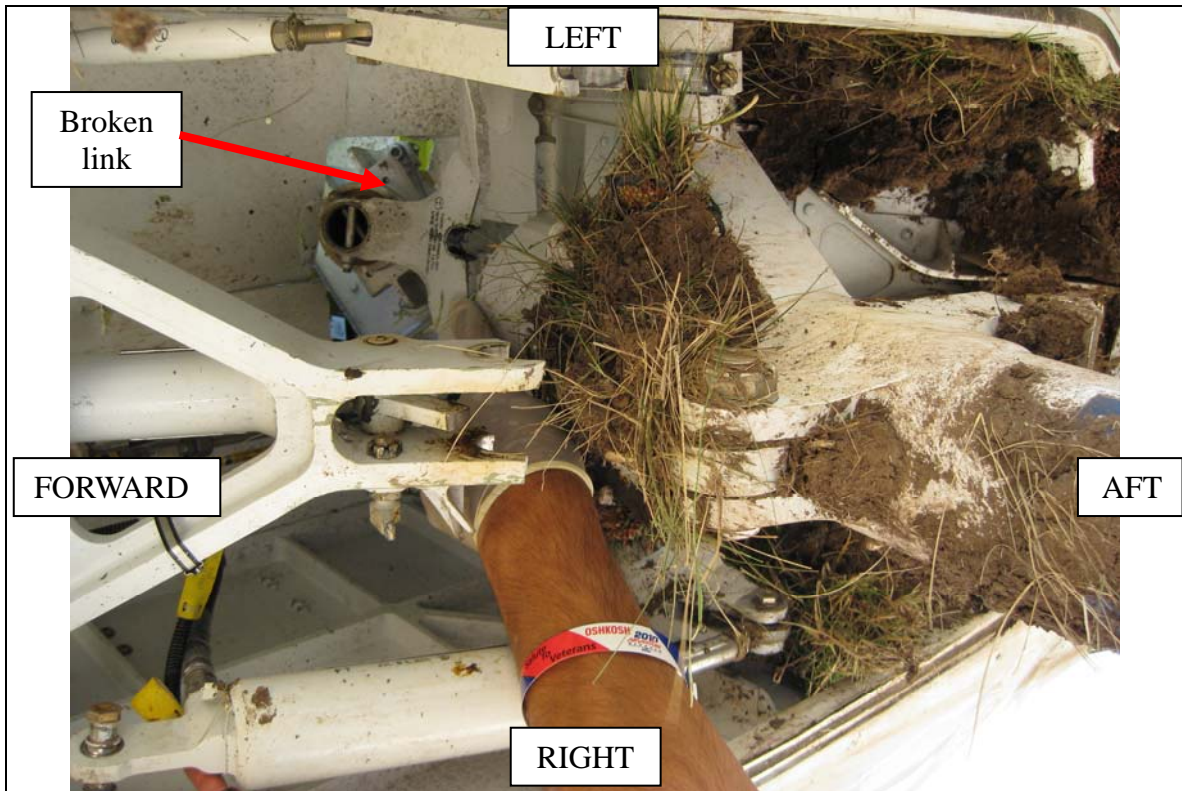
Arrow points to the nose steering link assembly broken at the top of the nose landing gear structure. View looks upward.
